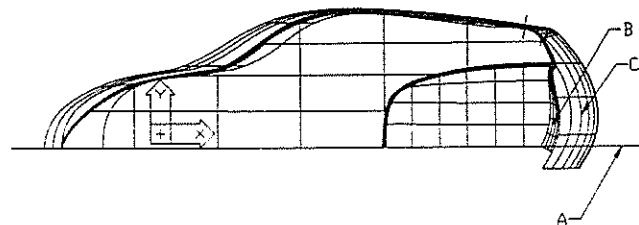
Surfaces erased, display set to front view, and horizontal line constructed
